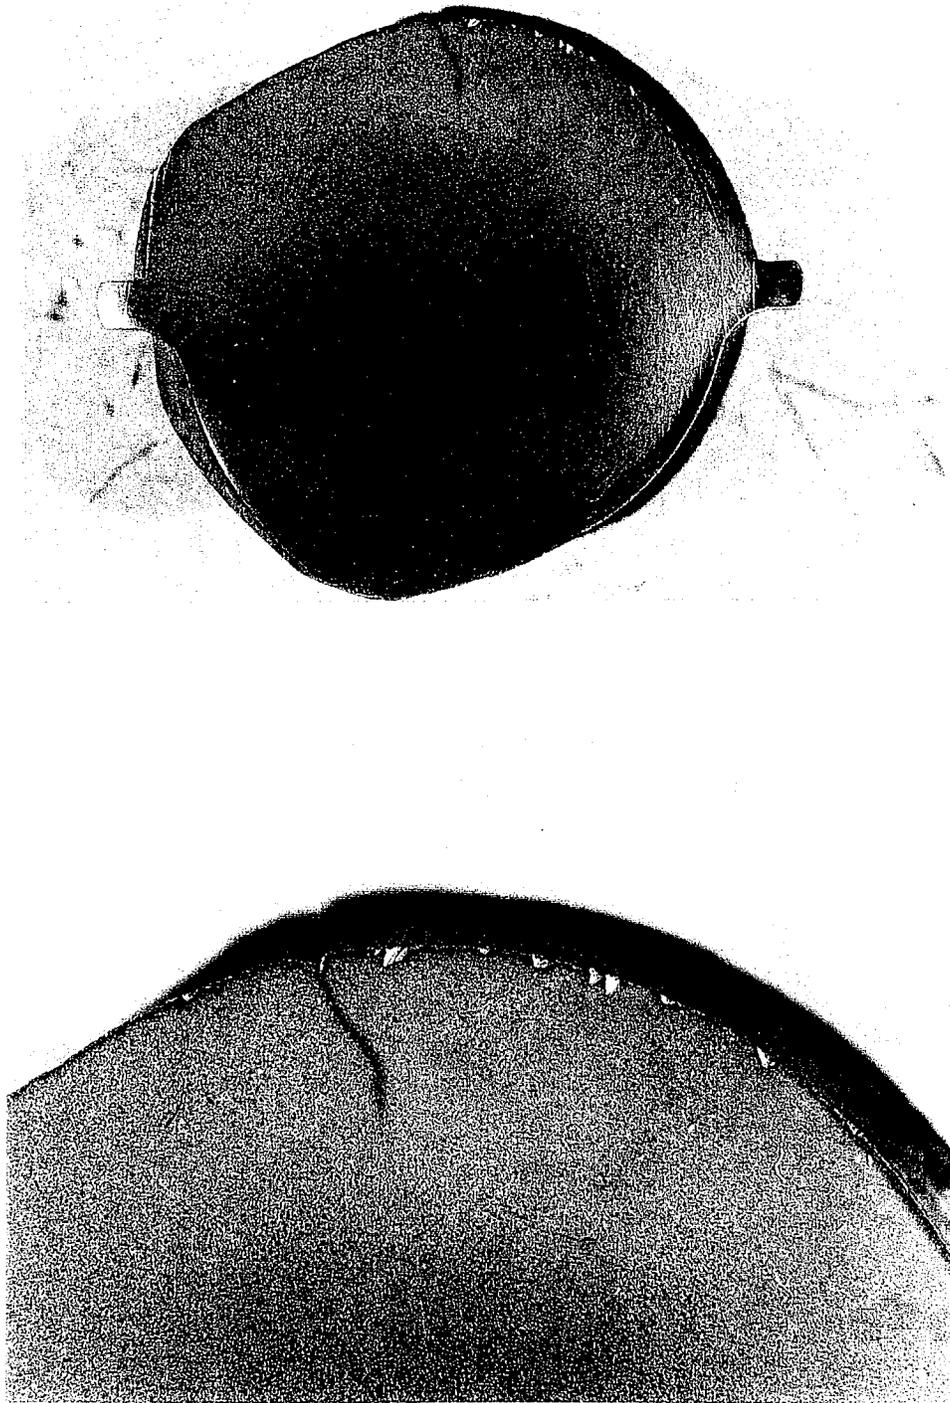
Cross-Sectional View of a #11 Bar Longitudinal Defect.
